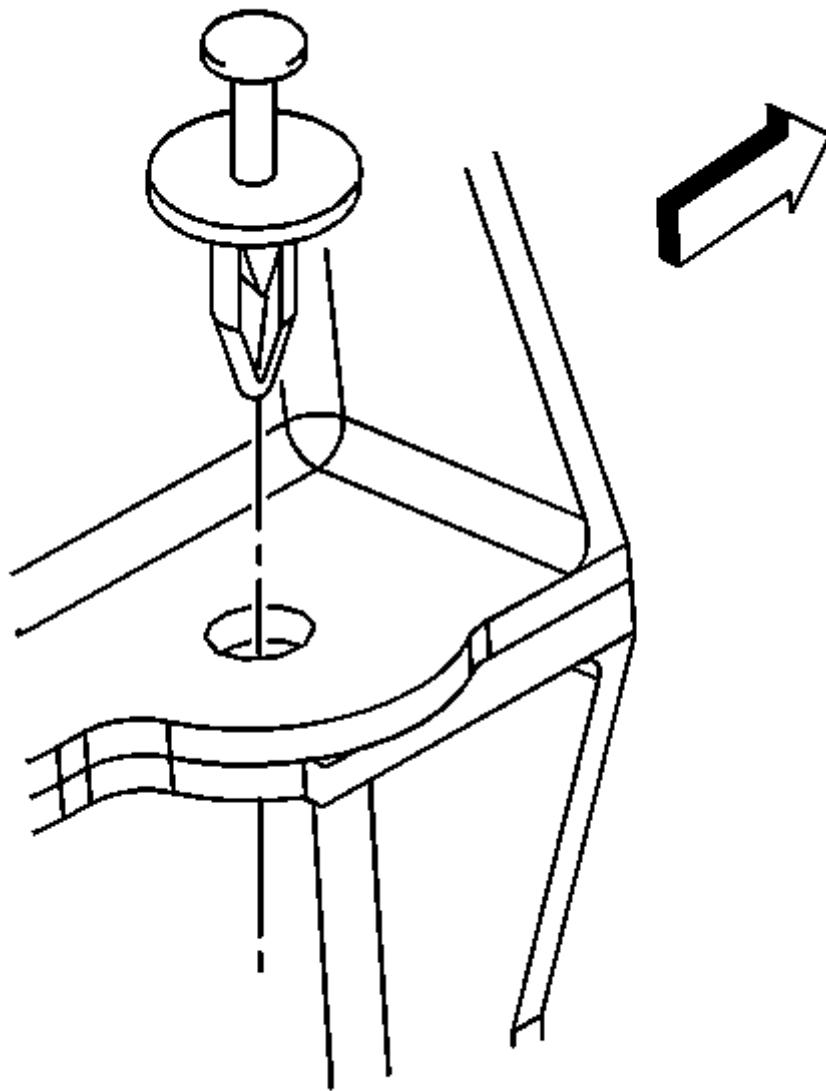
View Of Throttle Body Heater Hose & Retainers
